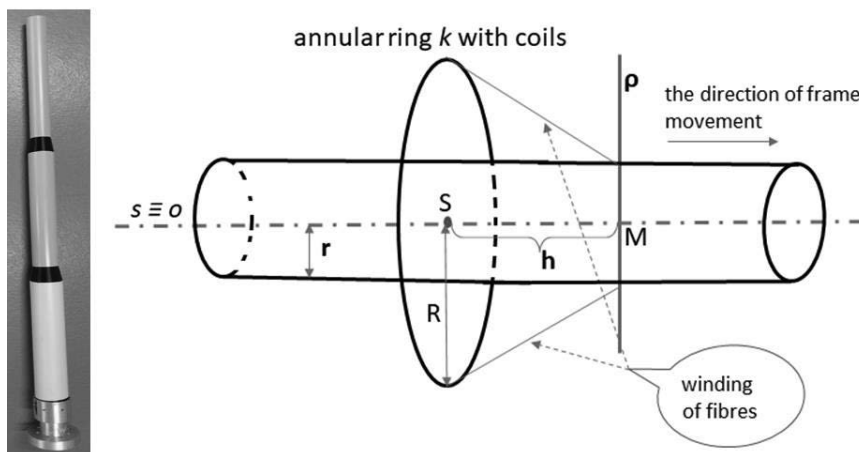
Example of a straight-line frame with three parts with different radii of their circle cross-sections on the left. The mathematical model of annular ring k of the winding head, straight-line frame and winding plane ρ is shown on the right.
